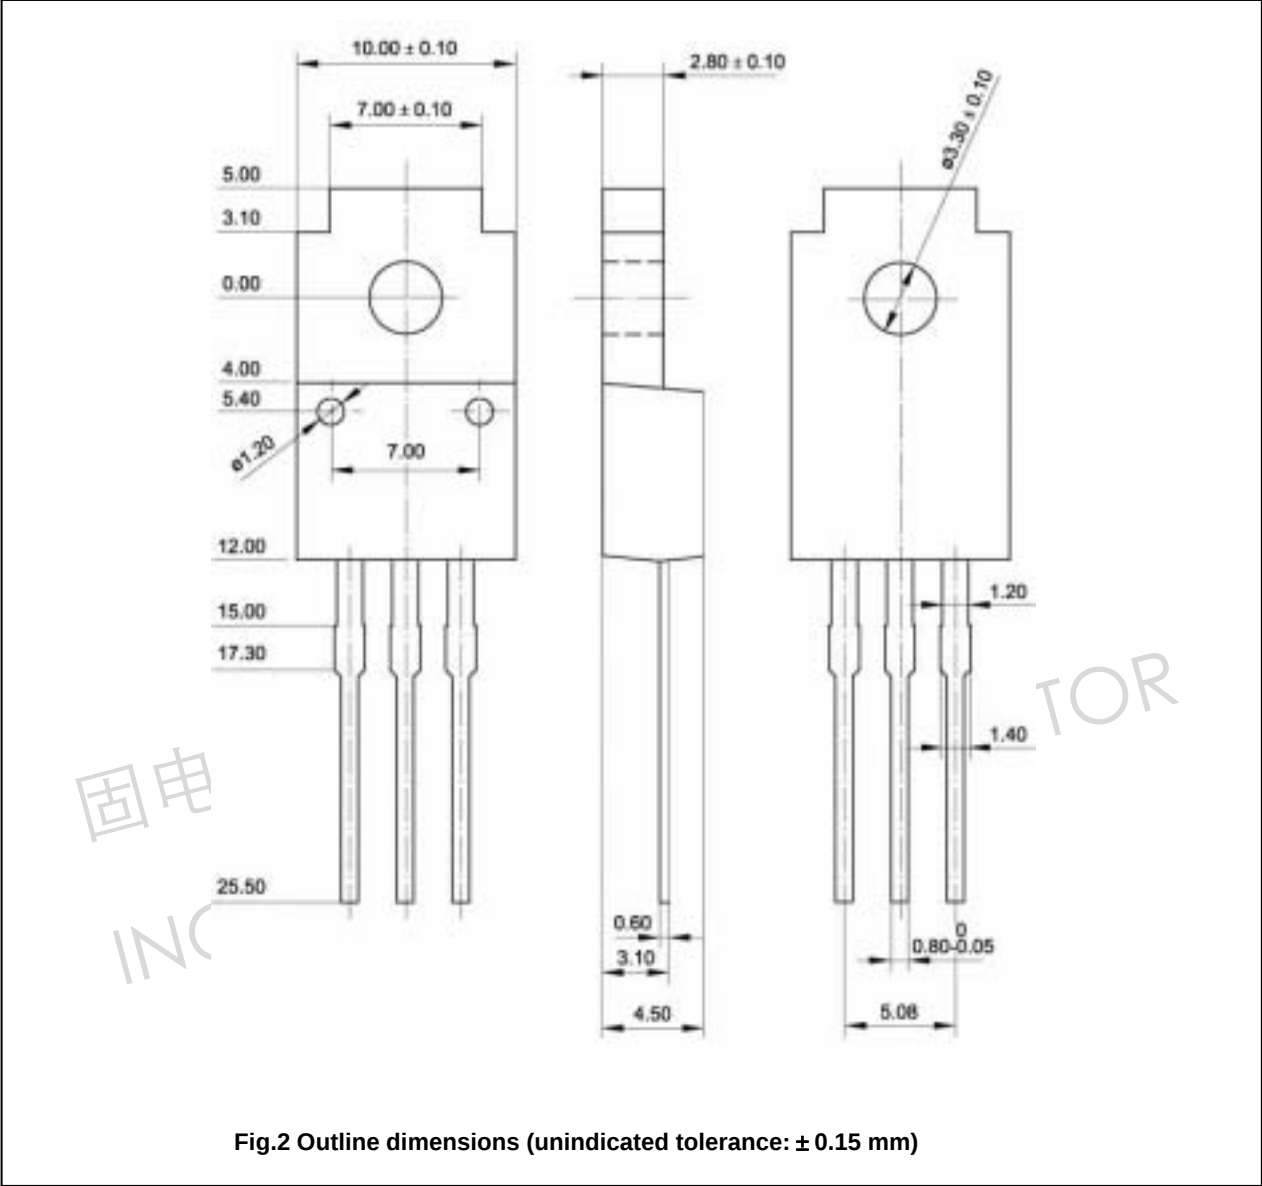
Outline dimensions (unindicated tolerance: ± 0.15 mm)
